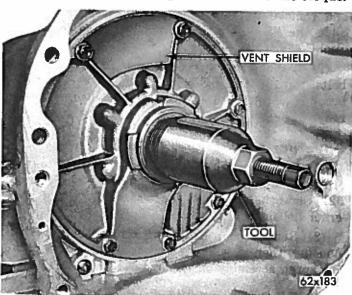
Removing Front Pump Oil Seal (Tool C-3861)
